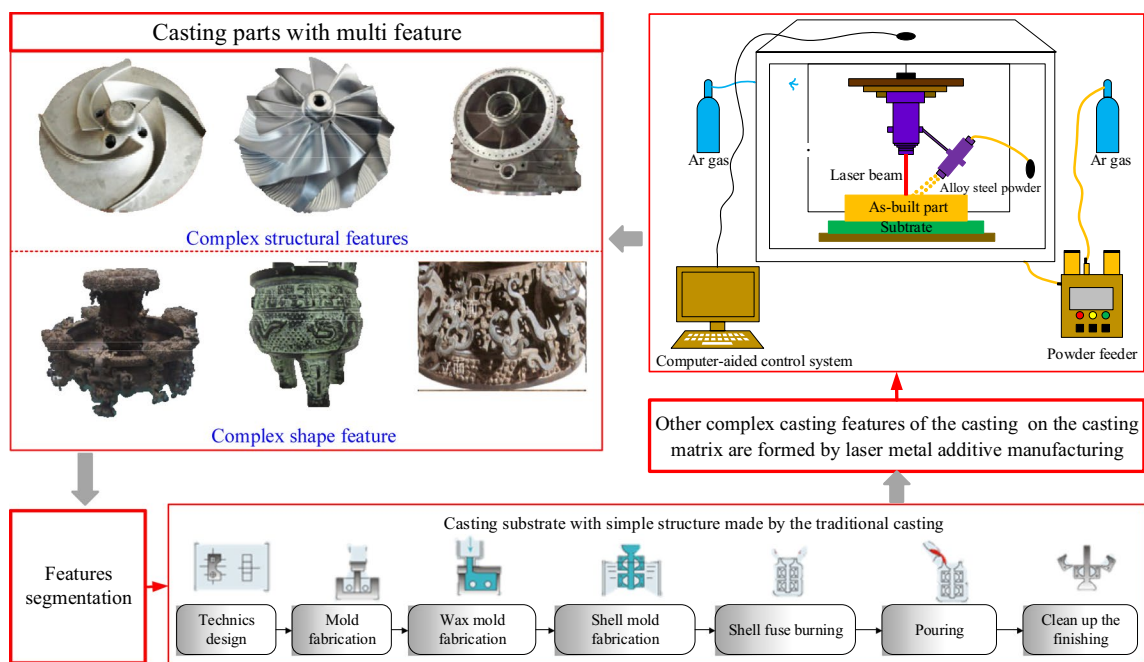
Complex casting parts manufactured by integrating AM into the casting process
